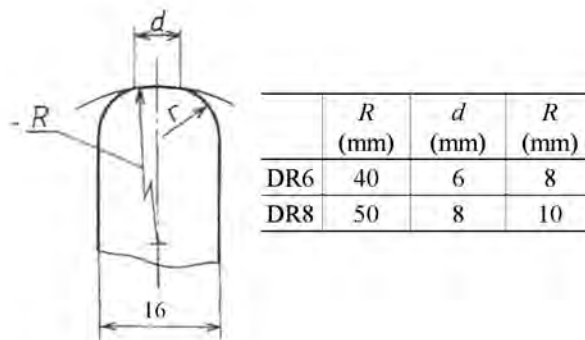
Schematic illustration showing appearance and dimensions of the DR type electrodes used in this section.
